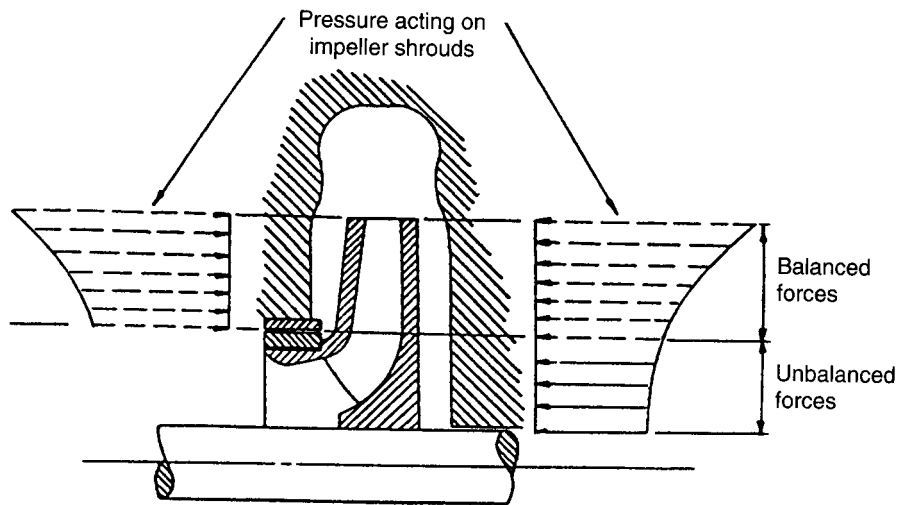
Hydraulic axial unbalance on a single-suction centrifugal-pump impeller. Courtesy Ingersoll-Dresser Pump Company.
